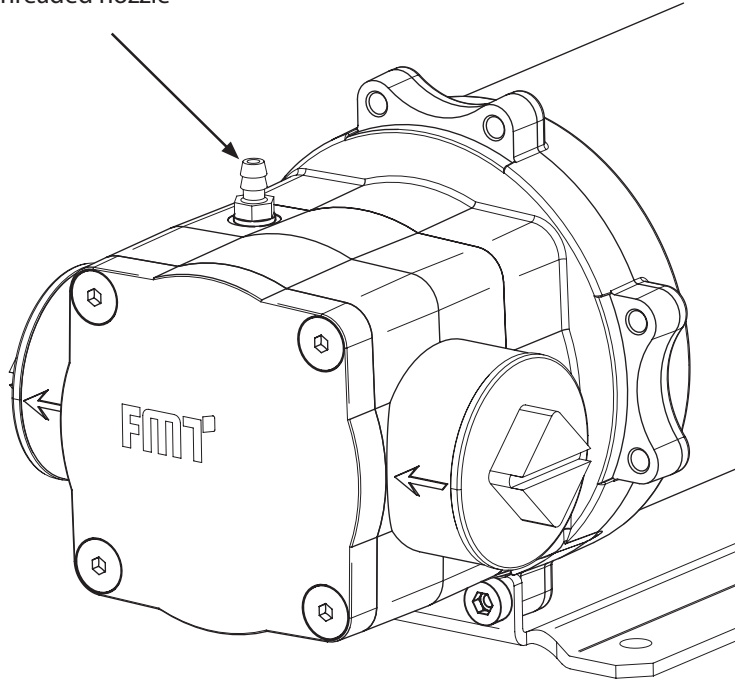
2: Threaded nozzle for siphon protection screwed in place
